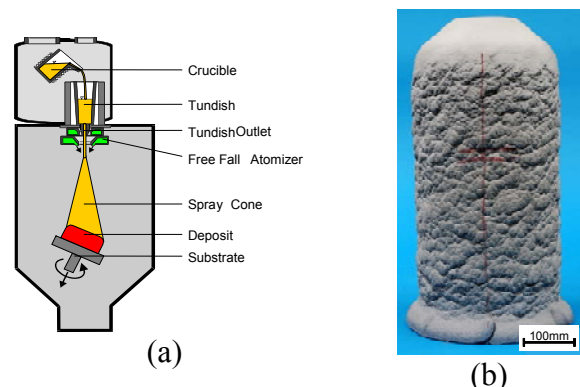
(a) Spray Forming Setup (b) Spray Formed Billet
